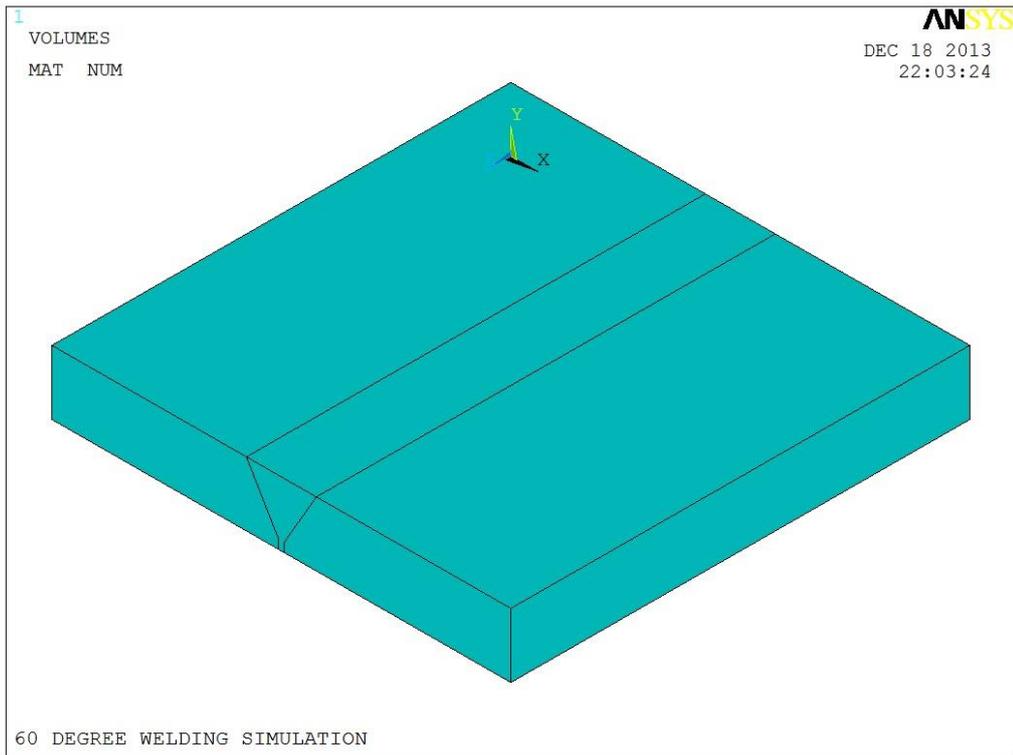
Geometry model for 60 Degree of Include bevel angle of a single V butt weld
